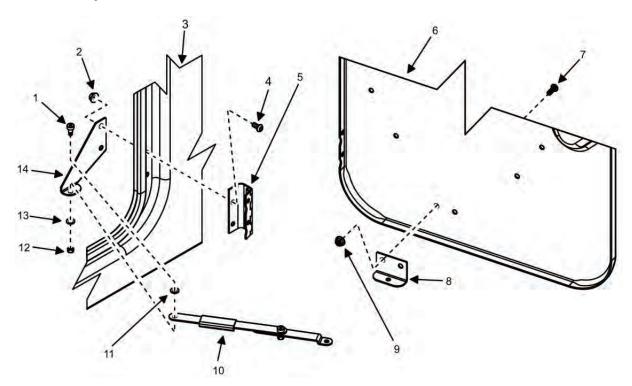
Door Stay, Bracket, and Hinge — Detail.
